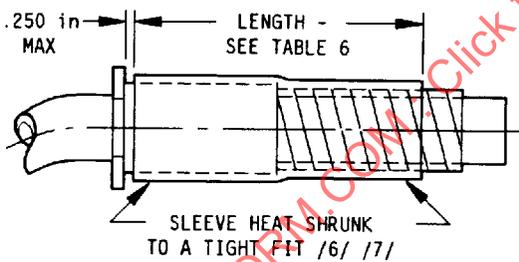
ABRASION SLEEVE ATTACHMENT
